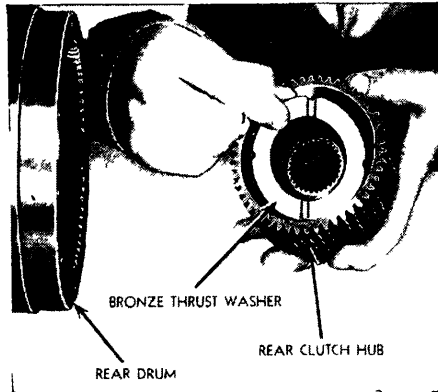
Install front bronze thrust washer into output bore in rear clutch hub and retain with vaseline
